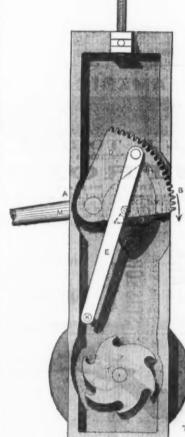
View of the Lower Side of the Slide, showing the Parts which Revolve the Turret.
